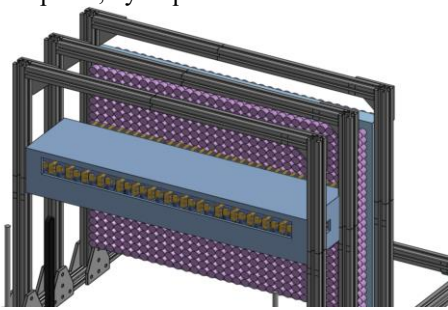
Carriage w/ Actuators and Custom Pin Board Mounted on Frame
